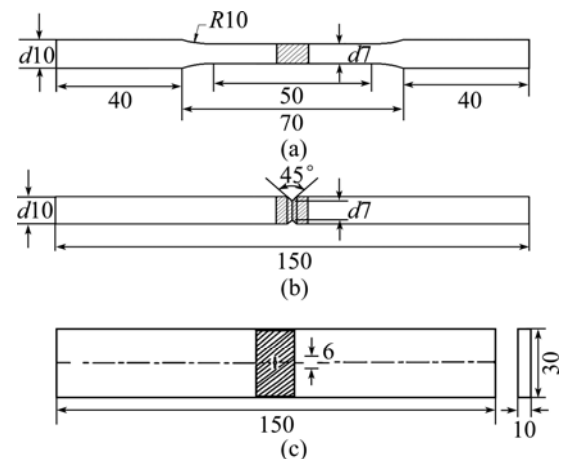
Dimensions of samples used for testing (unit: mm): (a) Dimensions of un-notched tensile specimens; (b) Dimensions of notched tensile specimens; (c) Dimensions of fatigue crack growth specimen
